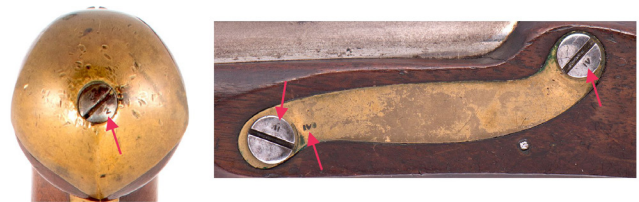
Assembly marks on the butt cap screw head, heads of the lock plate retaining screws and side plate.
